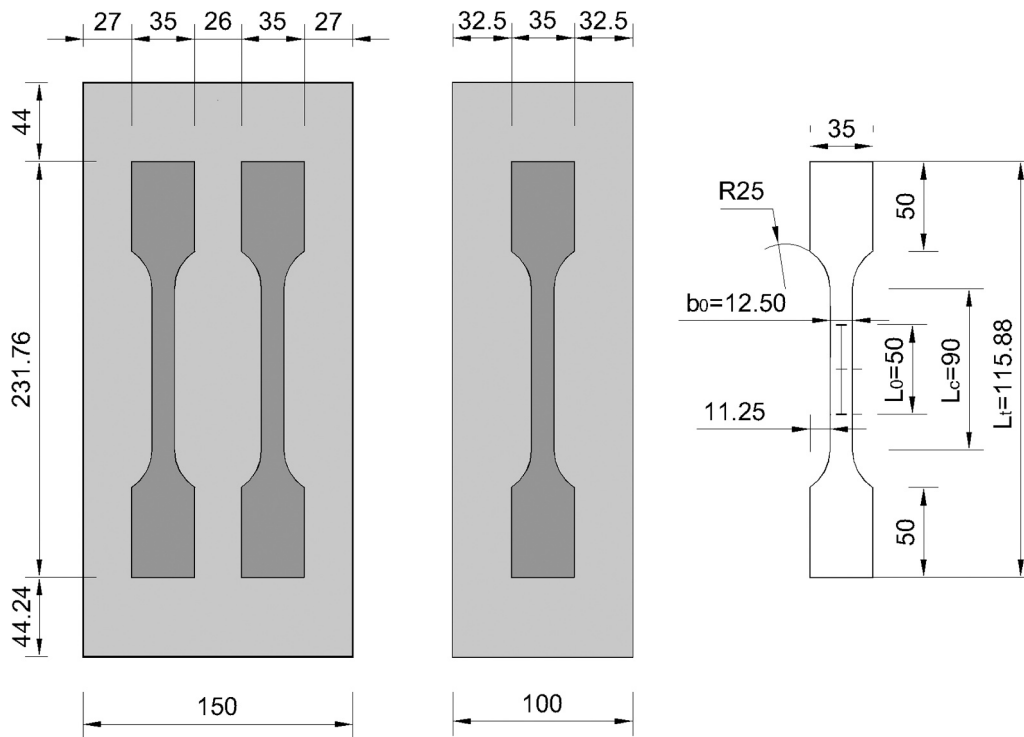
Coupons dimensions machined from stainless steel profiles.
